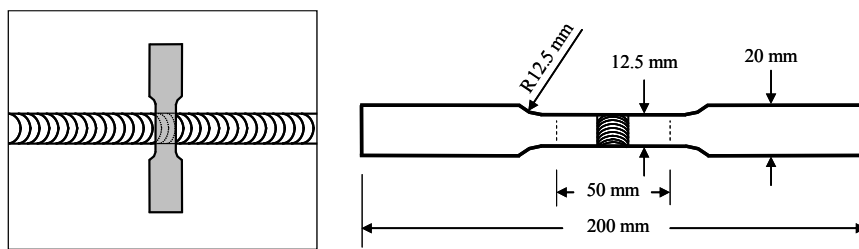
Specimen of tensile coupon tests for the mechanical property characterization of the welded material
